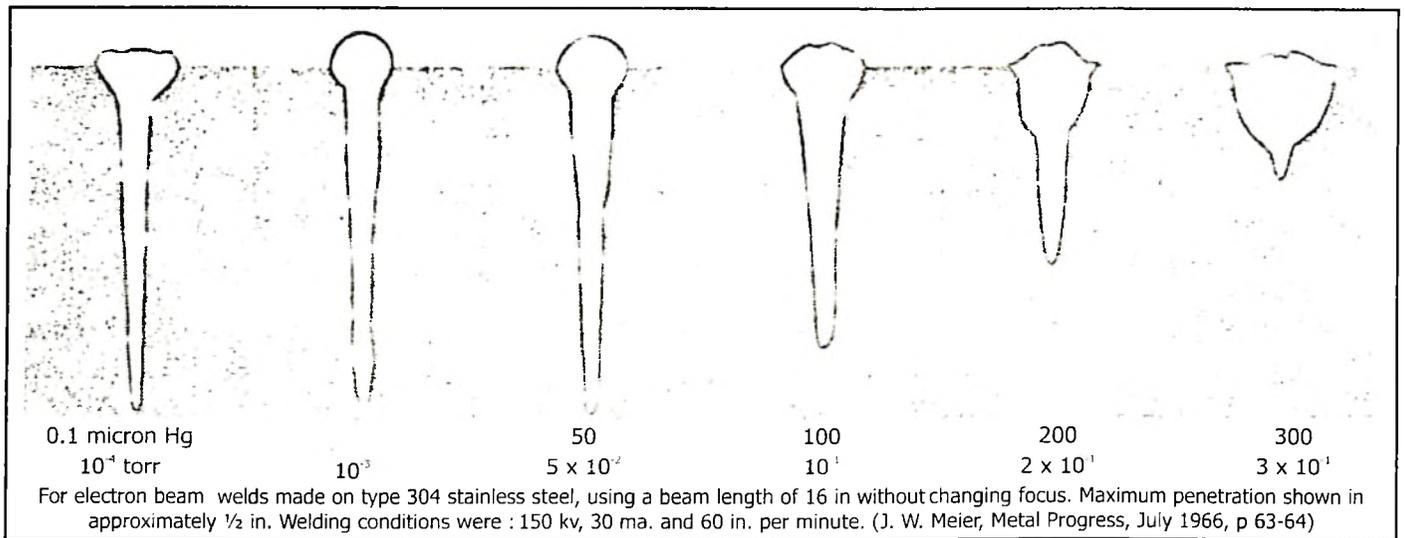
<sup>23</sup> Effect of welding-chamber pressure on penetration and weld shape
